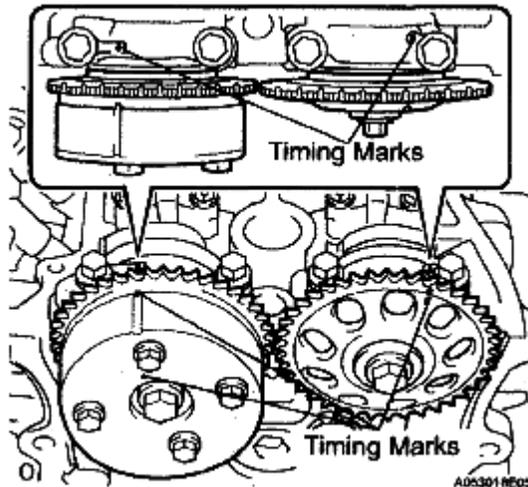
Identifying Timing Mark On Camshaft Timing Gear
